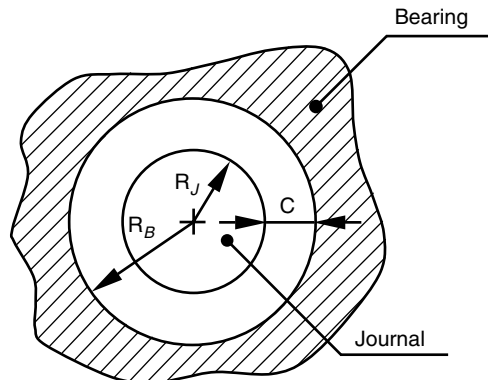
Revolute joint with clearance, that is, the so-called journal–bearing
